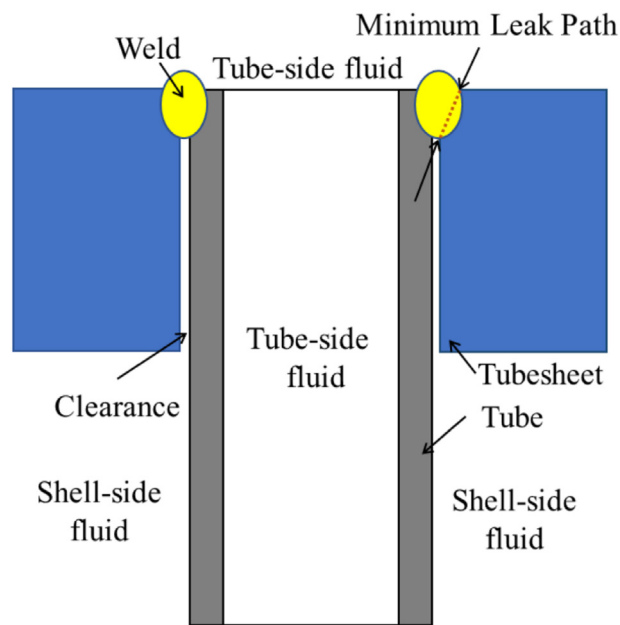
Tube-to-tubesheet weld separating the tube-side and shell-side fluids in shell and tube heat exchanger.
